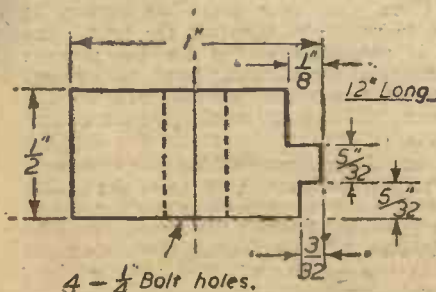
A solid side piece for the jig shown in Fig. 4.
